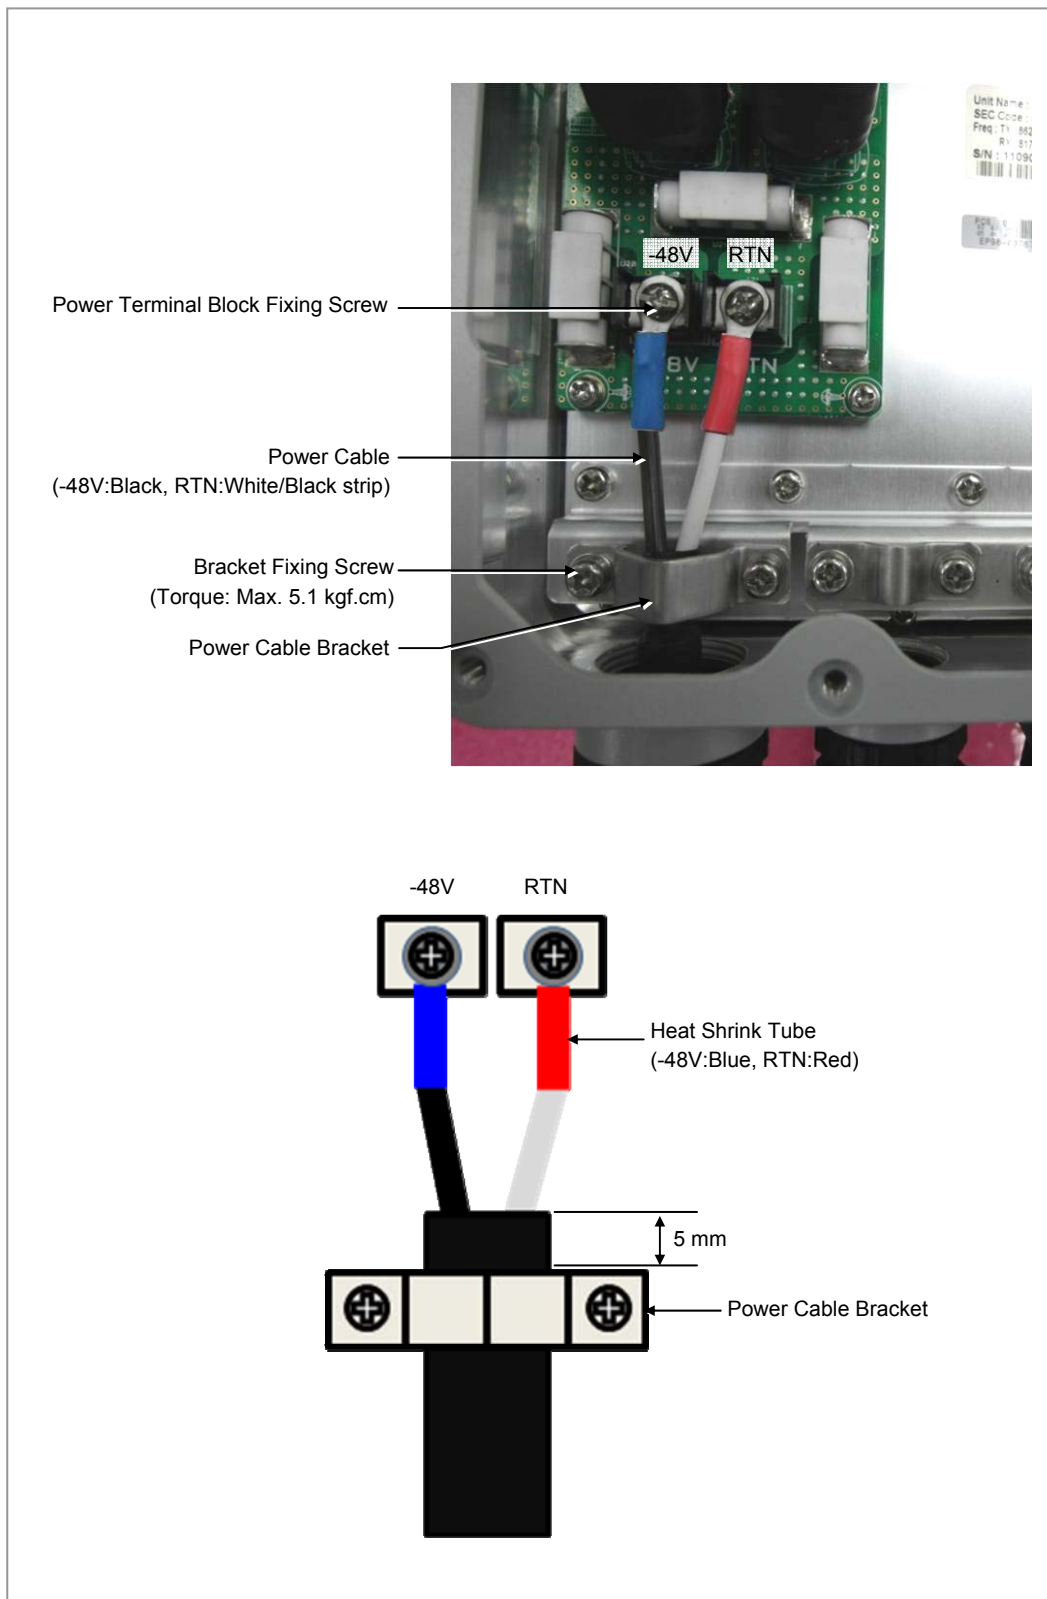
Connecting RRH-C2A power cable (AWG8) (4)
